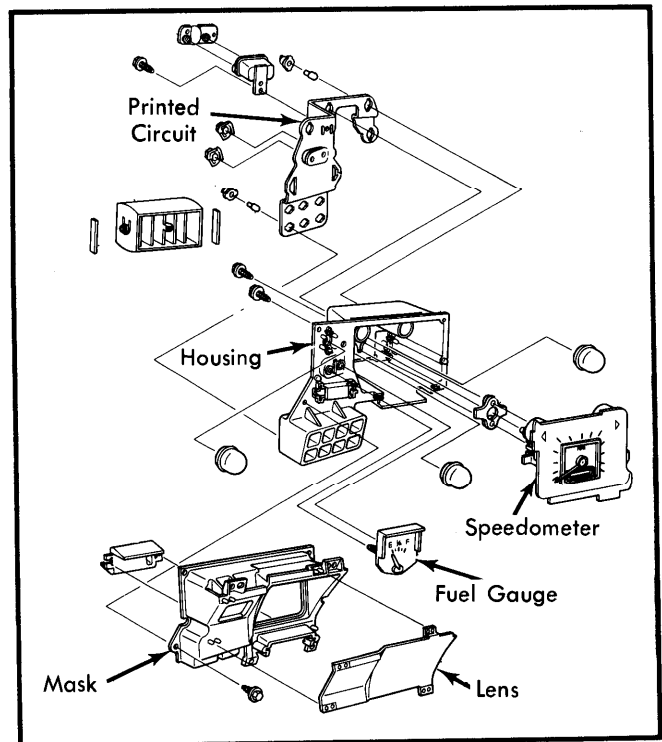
Granada, Monarch & Versailles Instrument Cluster
